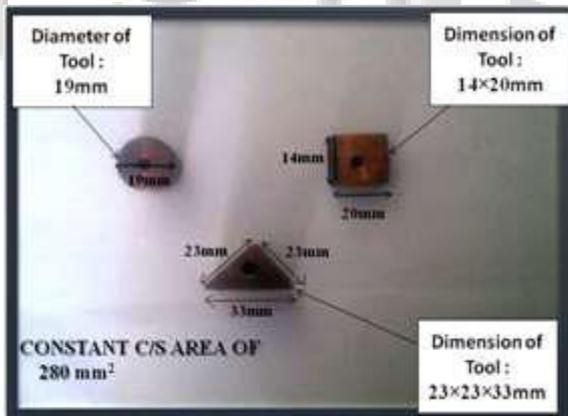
Raw material pure copper (electrode shapes) as per required dimensions
